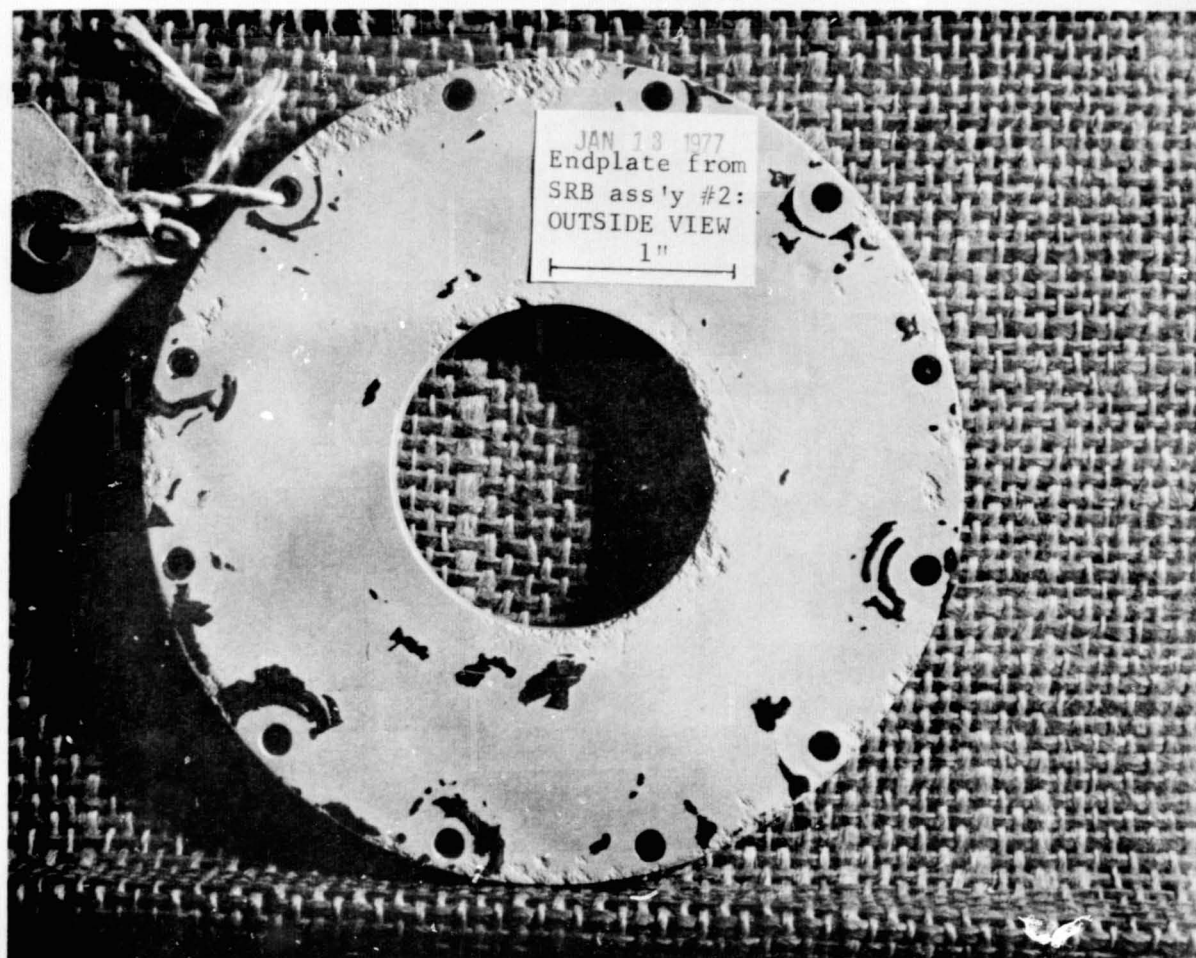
End plate (No. 24 connector mounting hole) from SRB watertight black box/cable assembly No. 2 after paint removal.
